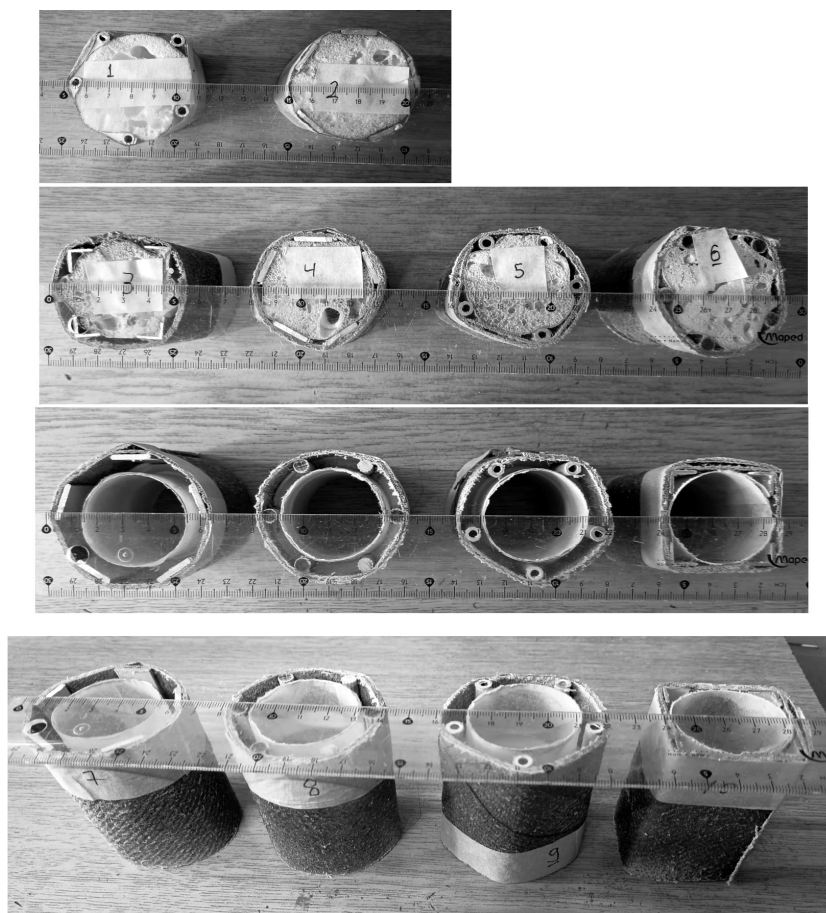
Representative cross - sections of the tested hybrid composite arm prototypes showing internal aluminium, wooden, foam, flax and rib elements.
